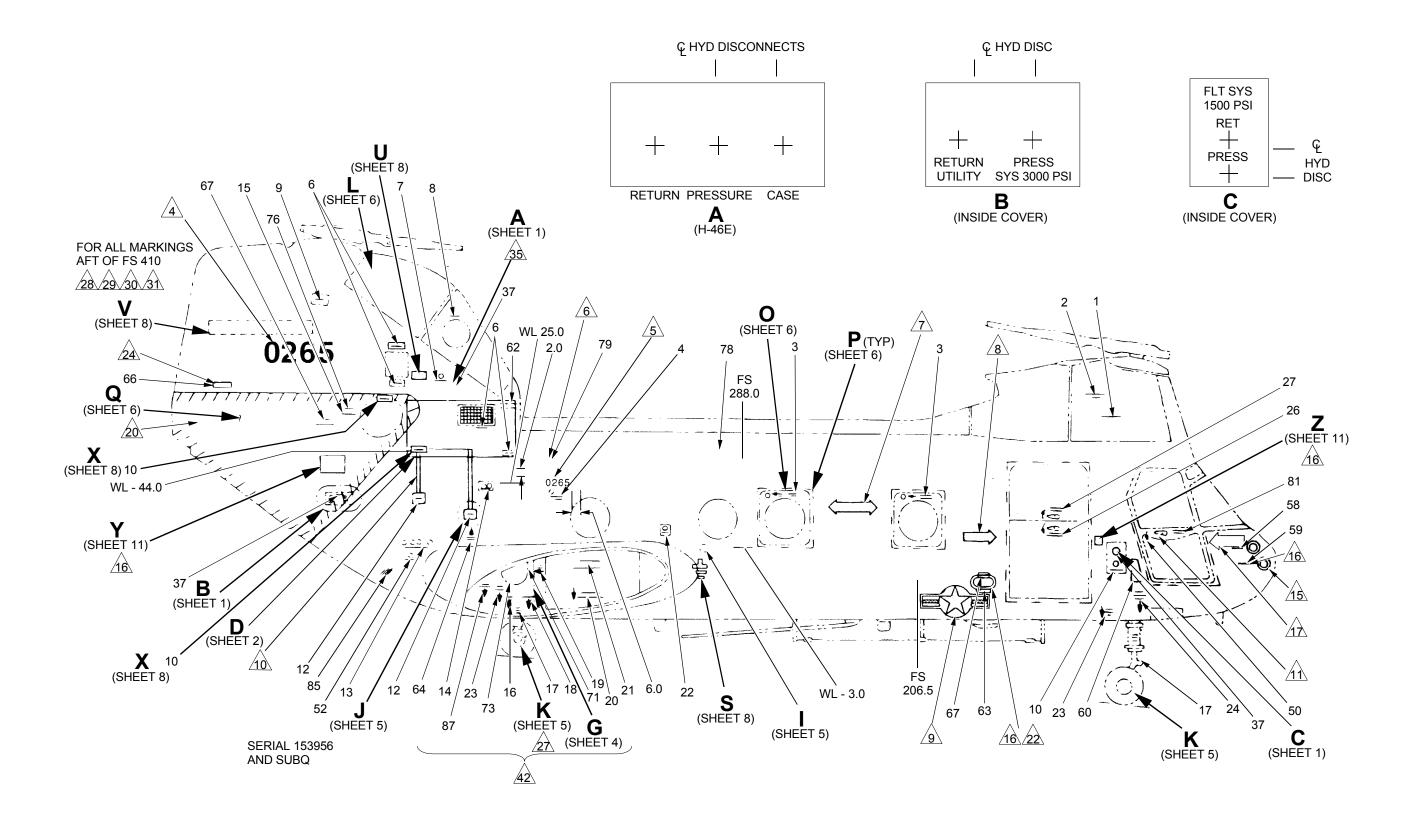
External Marking and Finishing - General (Sheet 1 of 16)
